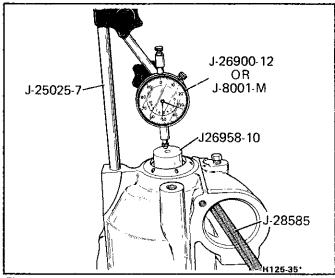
Final Drive End Play Selective Thrust Washer (680) Measurement
